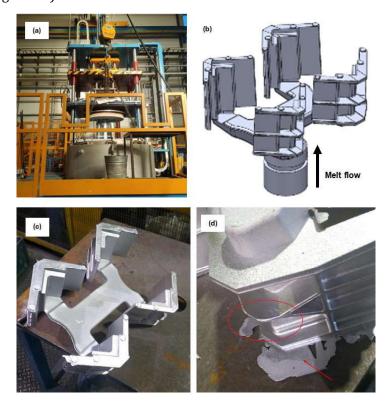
(a) LPDC equipment, (b) new die design, (c) 1st components, (d) example of poor filling.
